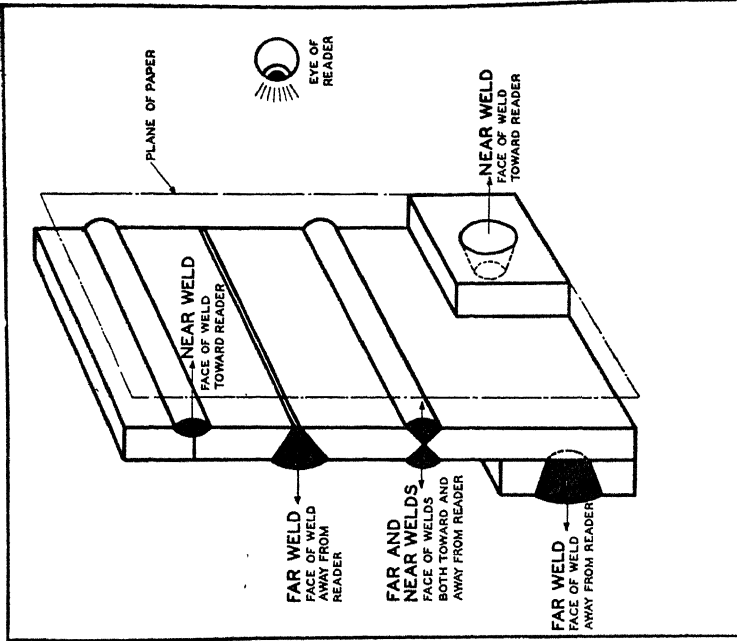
Facing of groove and plug welds parallel to plane of paper.
